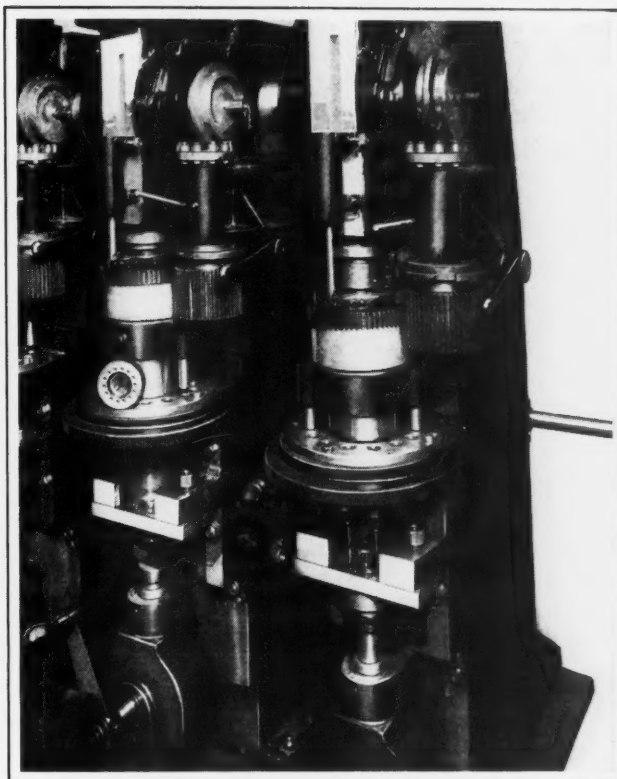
View Showing the Indexing Mechanisms and Clamping Fixtures of Two Units
